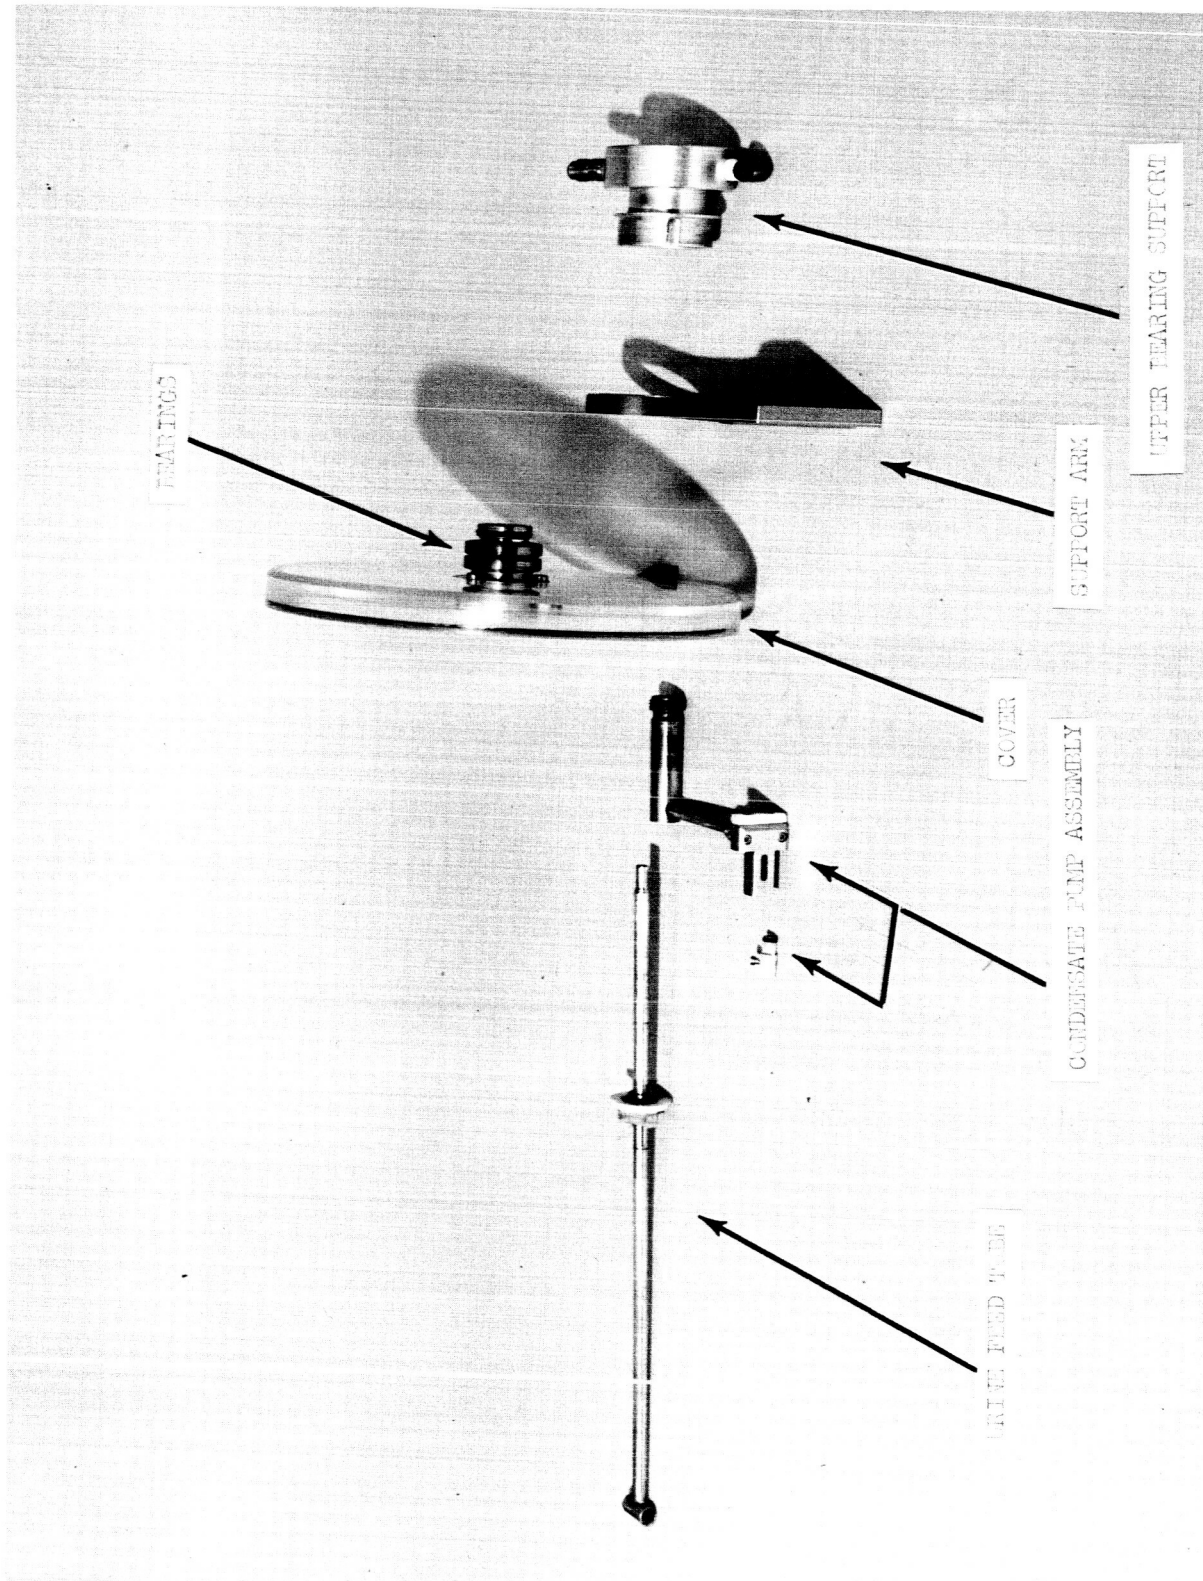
DISASSEMBLY OF UPPER BEARING SUPPORT AND CONDENSATE PUMP
